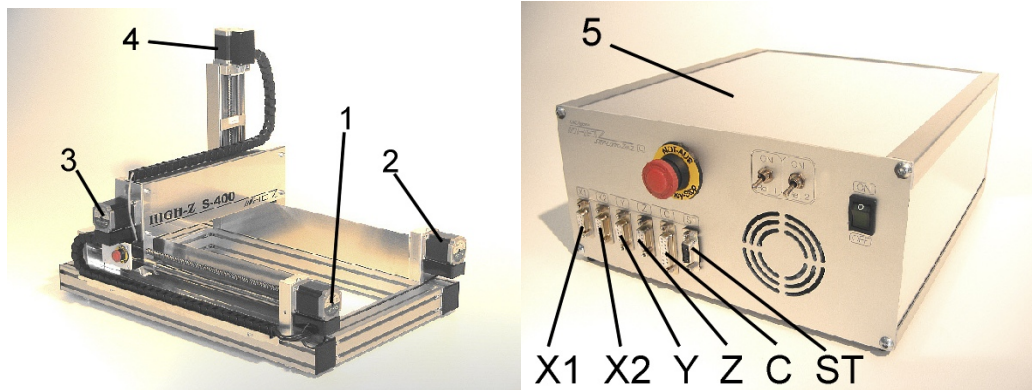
Illustration No. 10: CNC-Milling Machine and Stepping motor control
